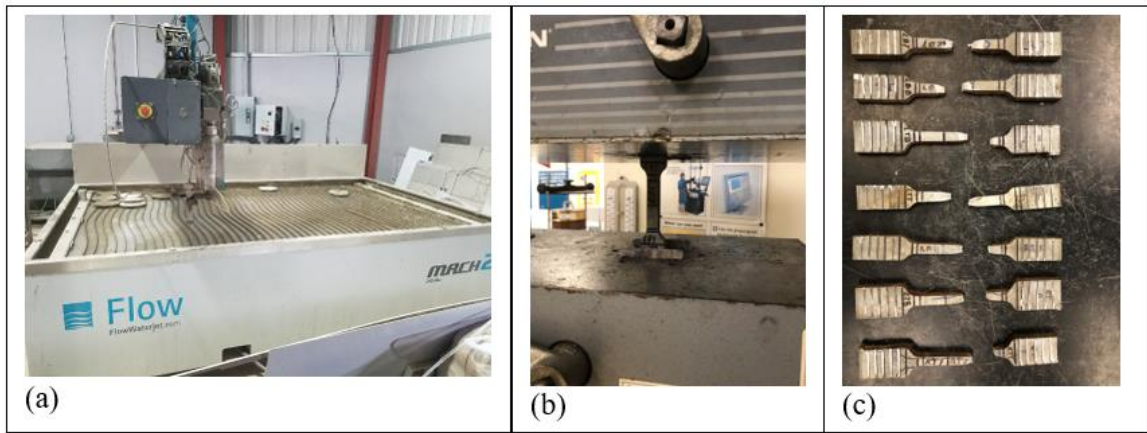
(a) Waterjet cutting machine, (b) specimens tension tested, and (c) rupture specimens.
